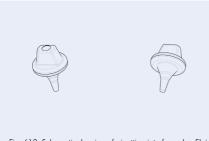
Schematic drawing of pipetting interface plug Fluidic 1225
